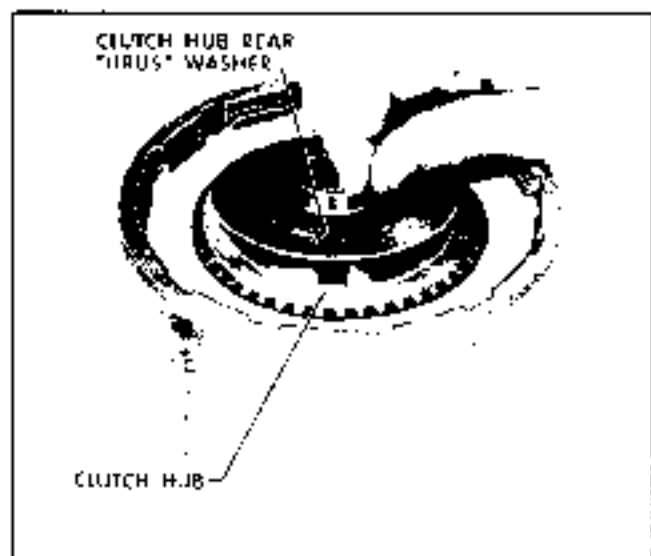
F-45 Removing Clutch Hub Rear Thrust Washer
